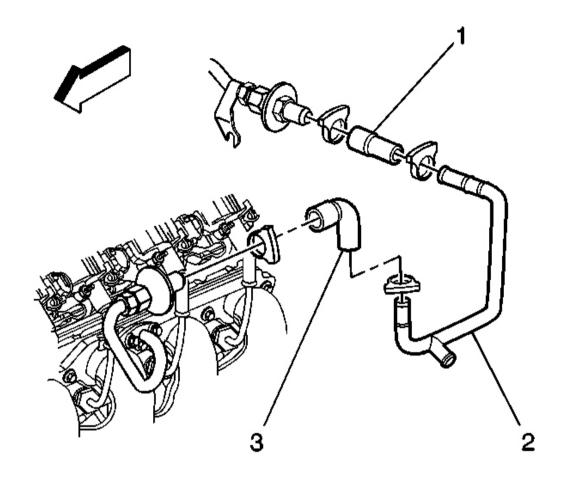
Right/Left Check Valve, AIR Injection Pipe Hose & AIR Pipe Courtesy of GENERAL MOTORS CORP.
